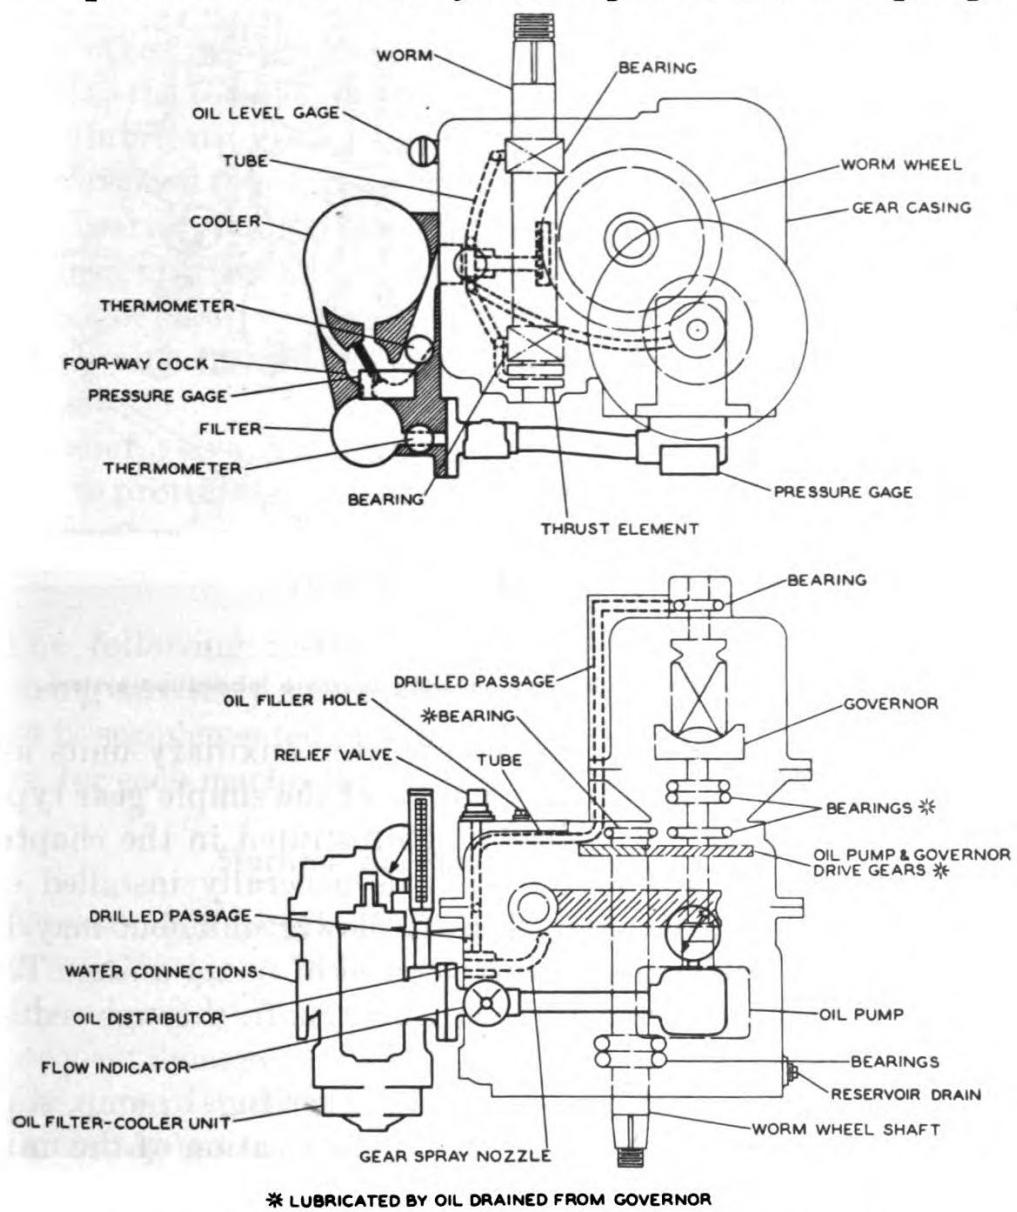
Pressure lubrication system for turbine-driven unit.
